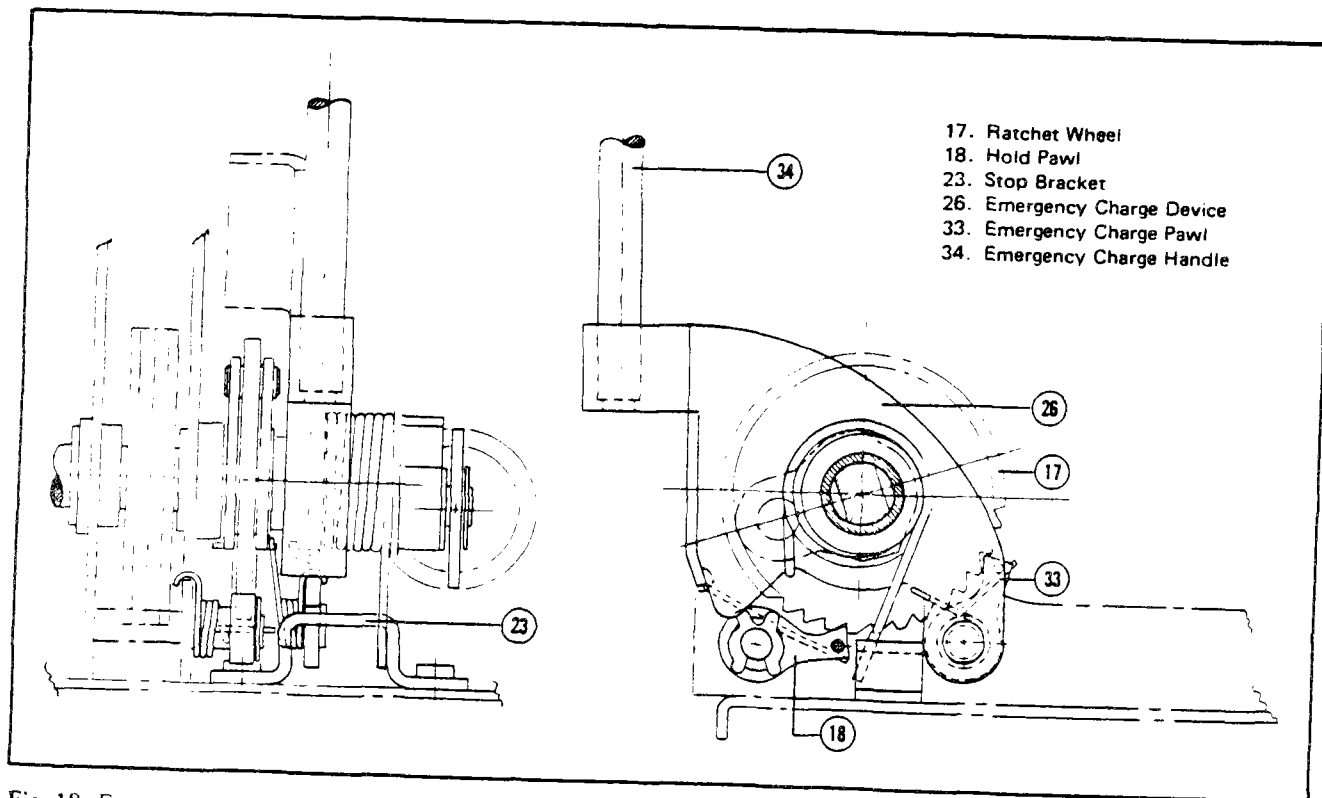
Emergency Spring-Charge on Power Operated Mechanism
